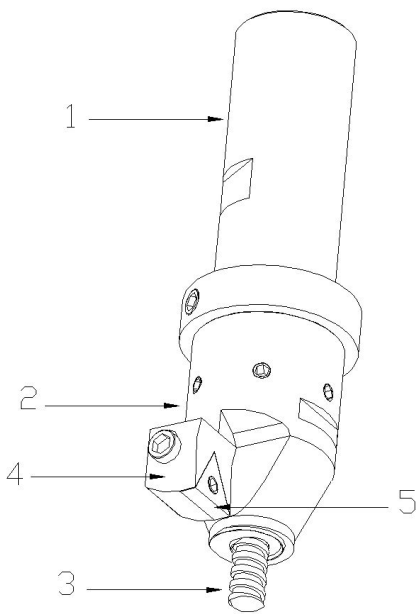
3D view of a modular FSC tool. (1) tool body, (2) shoulder, (3) probe, (4) cutting insert clamping, (5) cutting insert.
